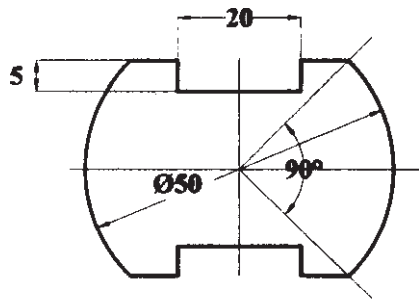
Blank of m.s. sheet 1 mm thk with shear stress = 400N/mm²
